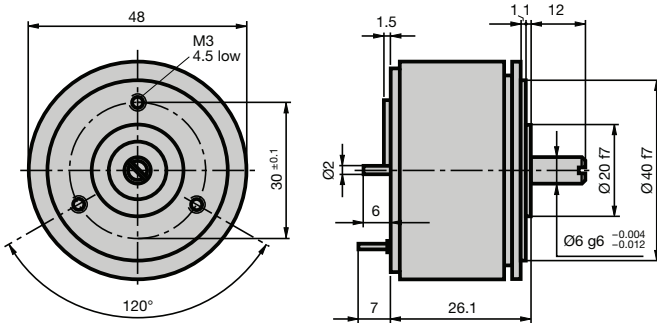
KINAX 2W2 with special drive shaft at front and rear.
